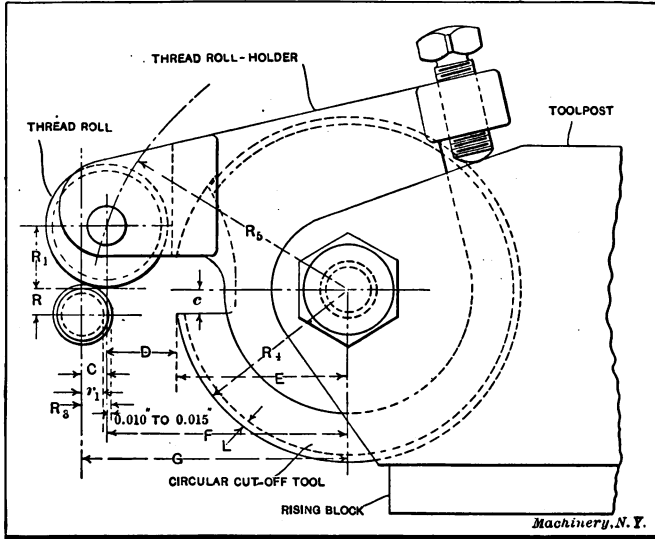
Diagram used in Finding the Total Rise on the Cam for Thread Rolling and Cutting-off
